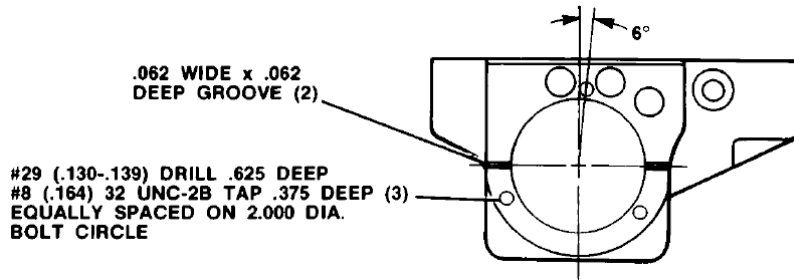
Dimensions for Machining 17 ft-lb Servo Cylinder for Weatherproof Boot
